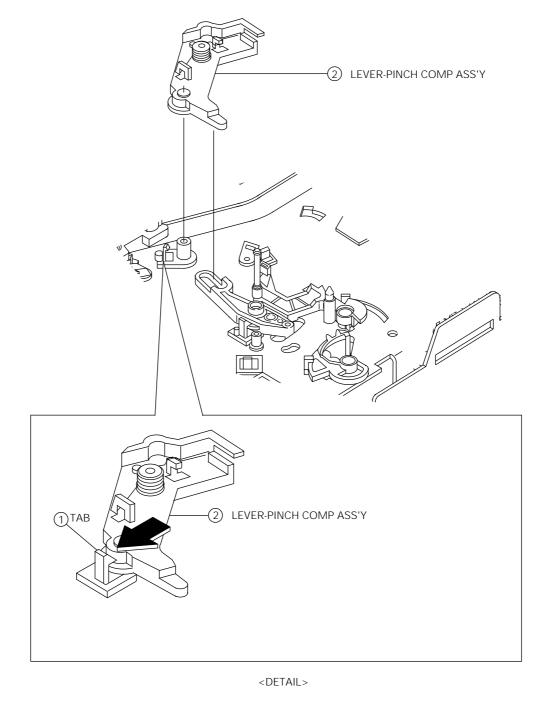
Lever Pinch Comp Ass'y Removal
